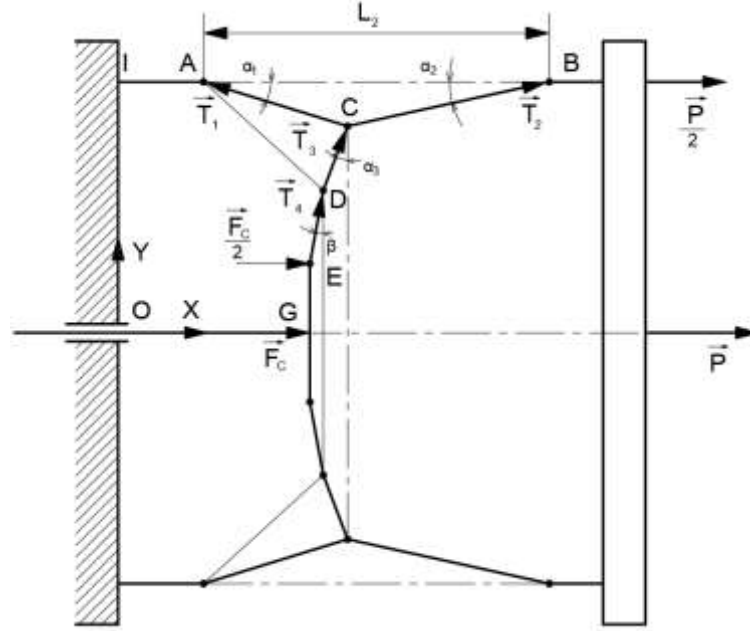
The five-point double-toggle clamping mechanism of the injection molding machine
